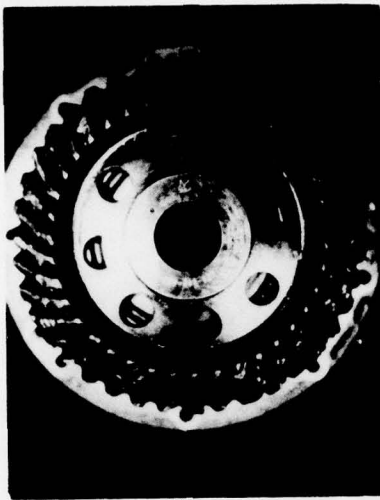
Gearbox BB-5; Pinion Teeth Cold-Welded to Ring Gear Teeth.
